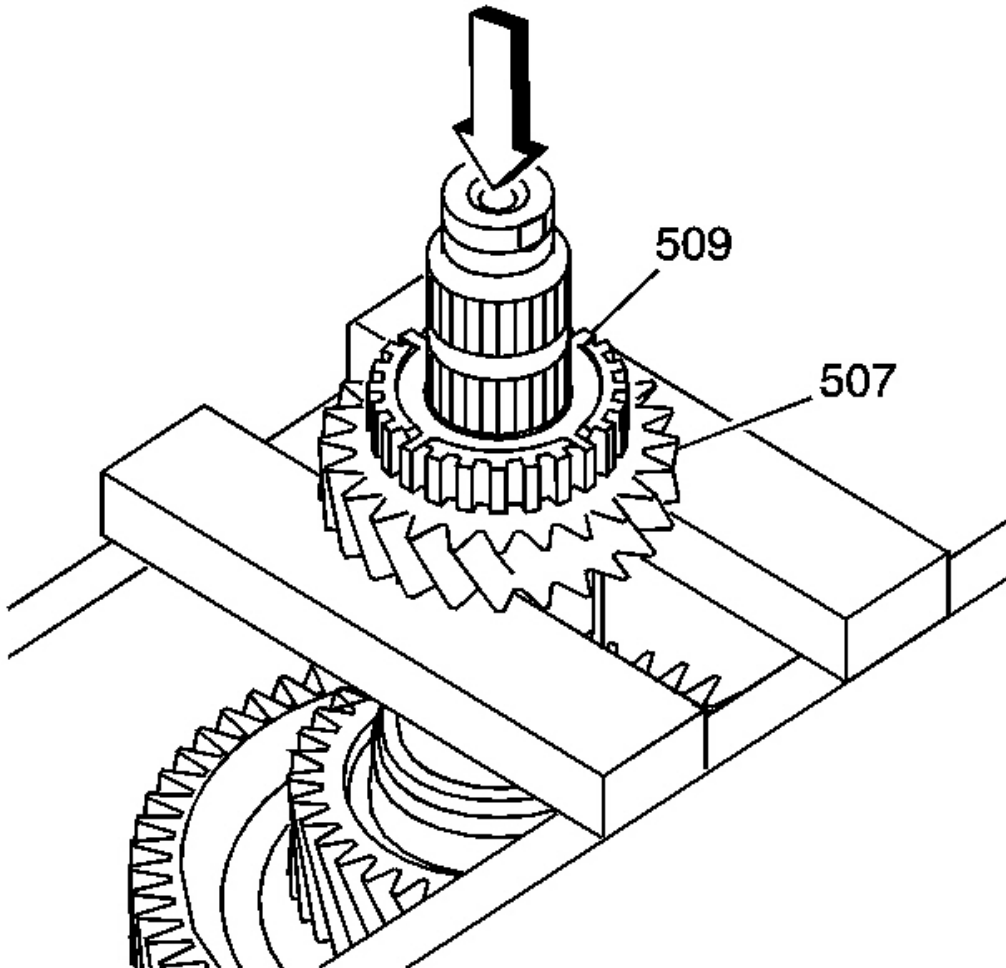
Removing The 5th/Reverse Synchronizer Hub & 5th Driven Gear Using A Hydraulic Press
